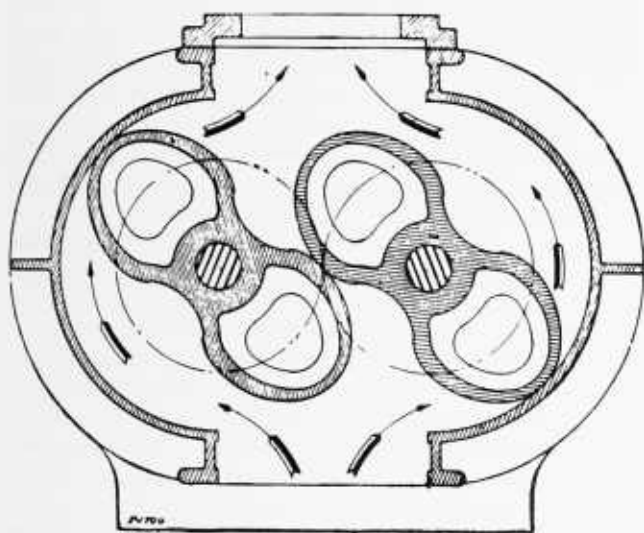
Cross section of a typical positive-pressure 2-lobe rotary air pump used for conveying cottonseed. Rotation may be reversed if desired.
